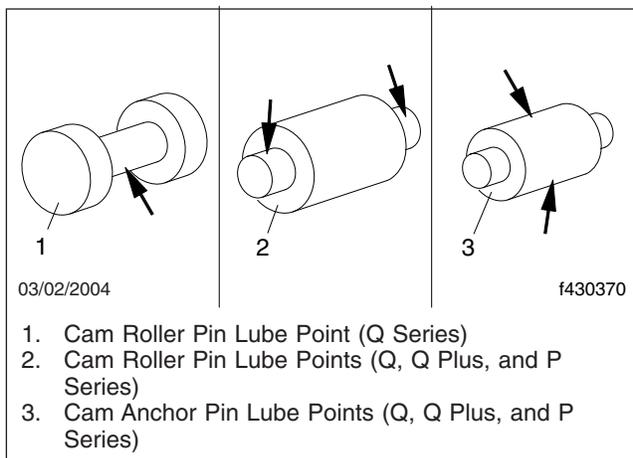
, Cam and Anchor Roller Pin Lubrication Points
